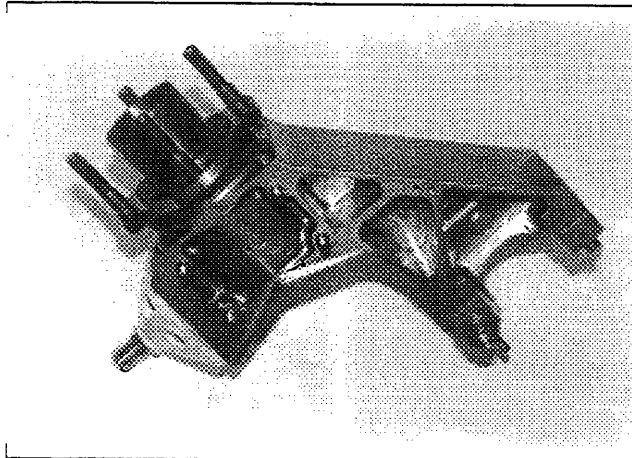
FRONT REINFORCED TOP MOUNT TYPE 1
